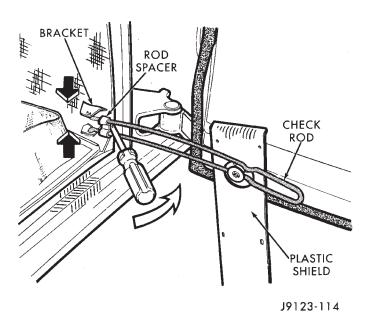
Check Rod Spacer Removal—Renegade Vehicles
